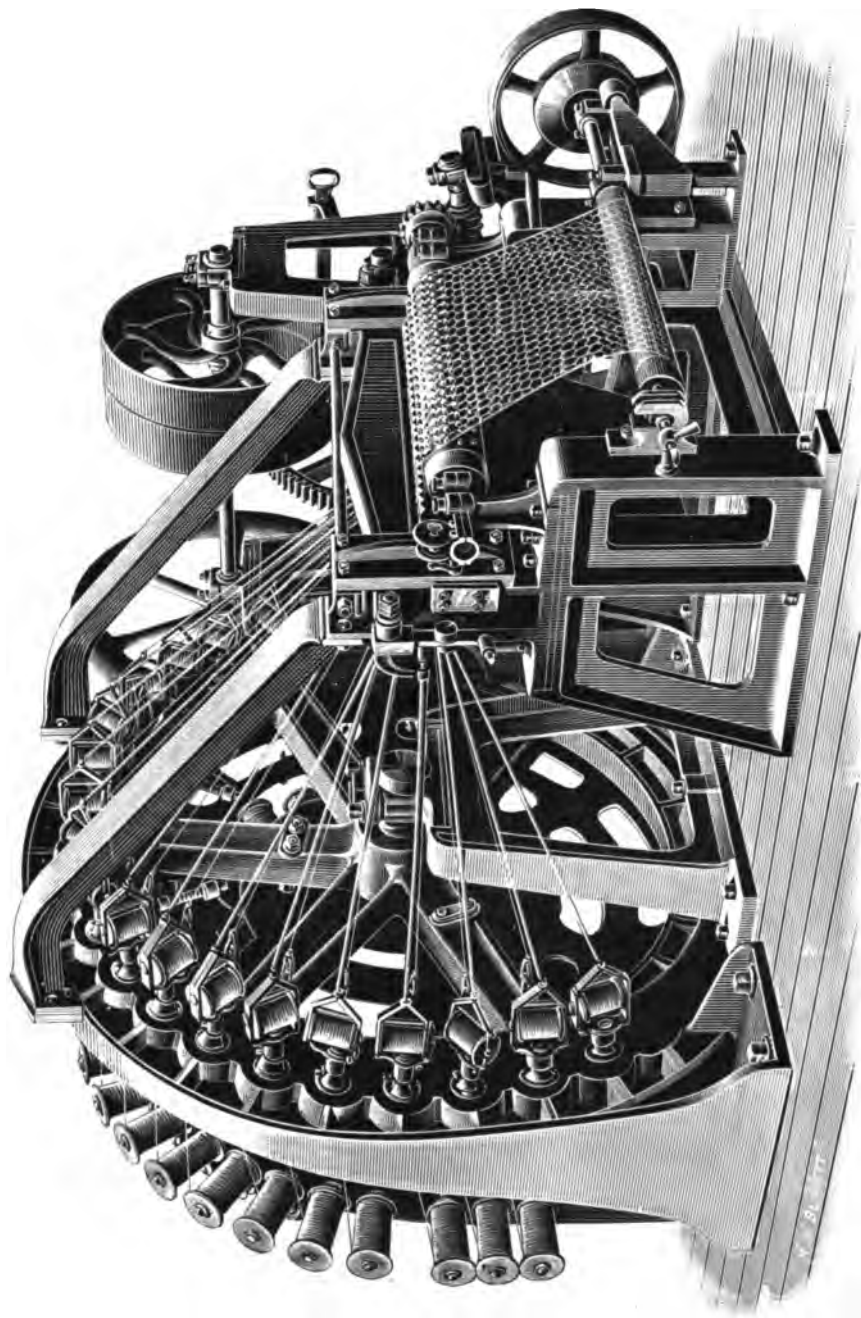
PATENT CONTINUOUS WIRE NETTING MACHINE.
